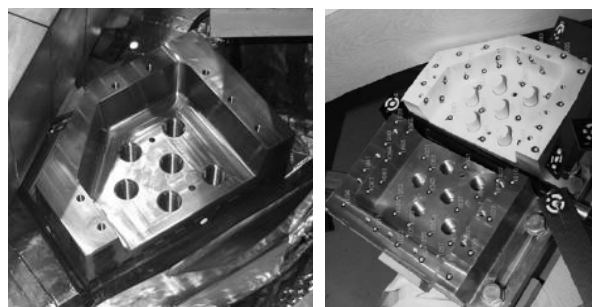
Coil block welded to NPC5 (left). Coil blocks of a test mock-up simulating assembly conditions (right) with reference marks for photogrammetric scanning.
